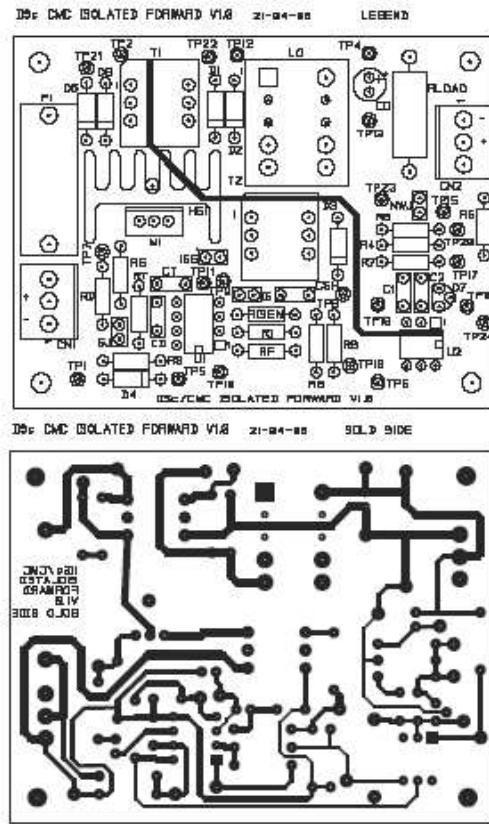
Solder and Component Side of CMC-Forward Converter
